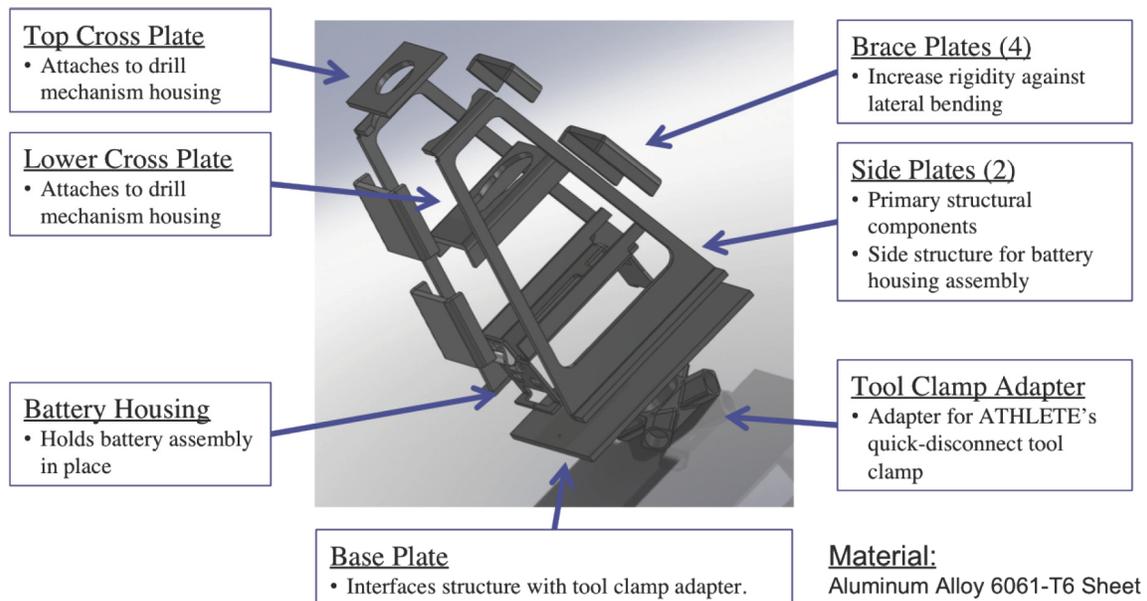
Labeled SolidWorks rendering of tool package structural components, exploded view.
